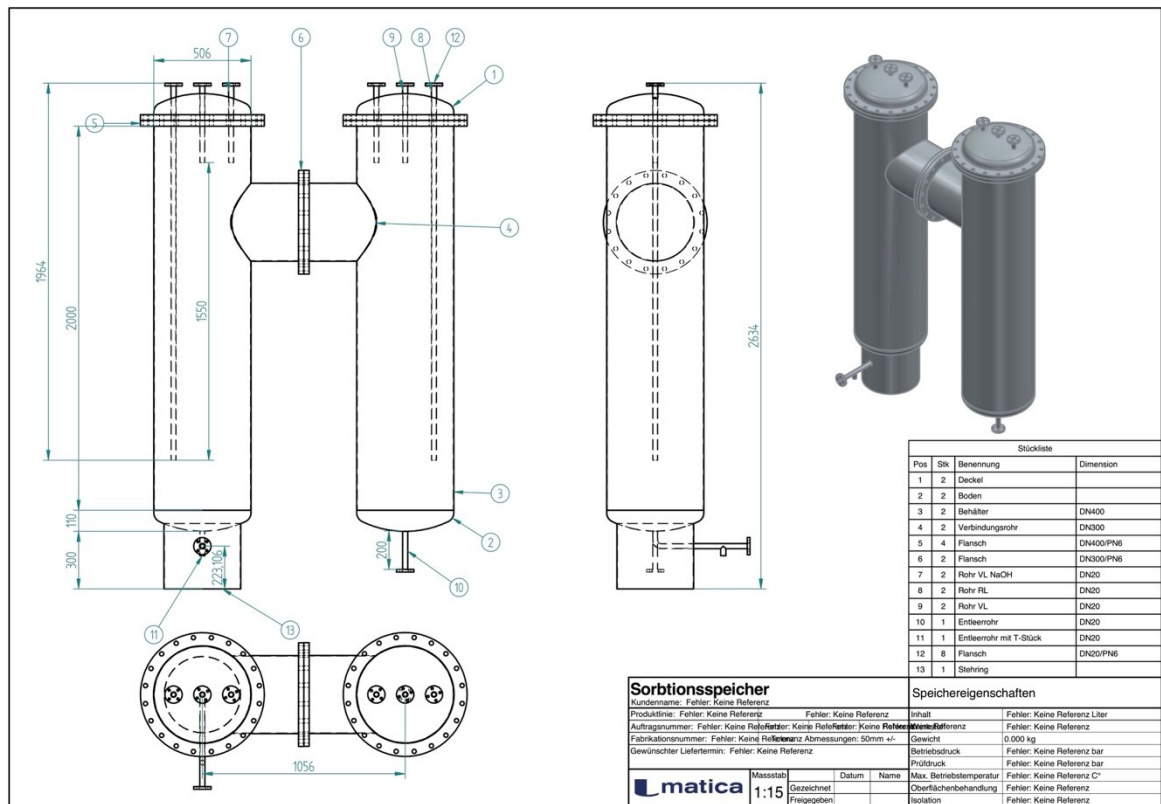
Technical drawing of the HMX-1 chamber showing the interconnected cylindrical vessel design and tube bundle arrangement.
